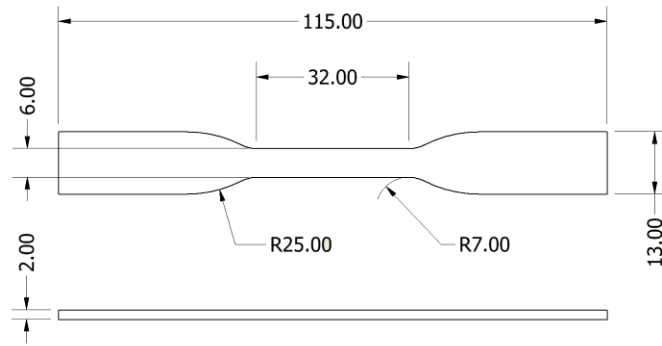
ASTM D638-10 type-IV tensile test specimen geometry.
